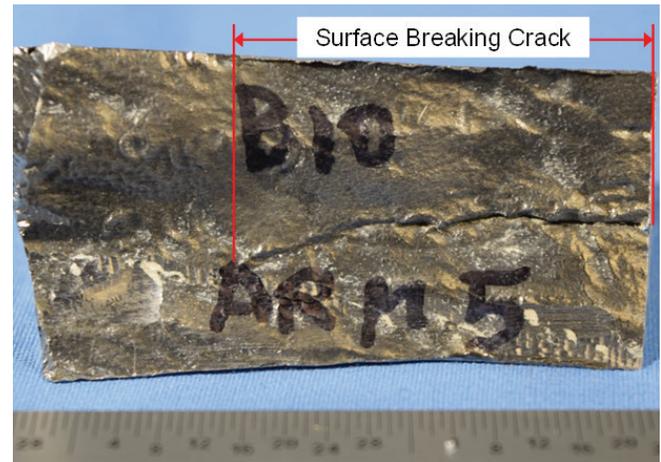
Crack located in the weld face metallurgical sample.
